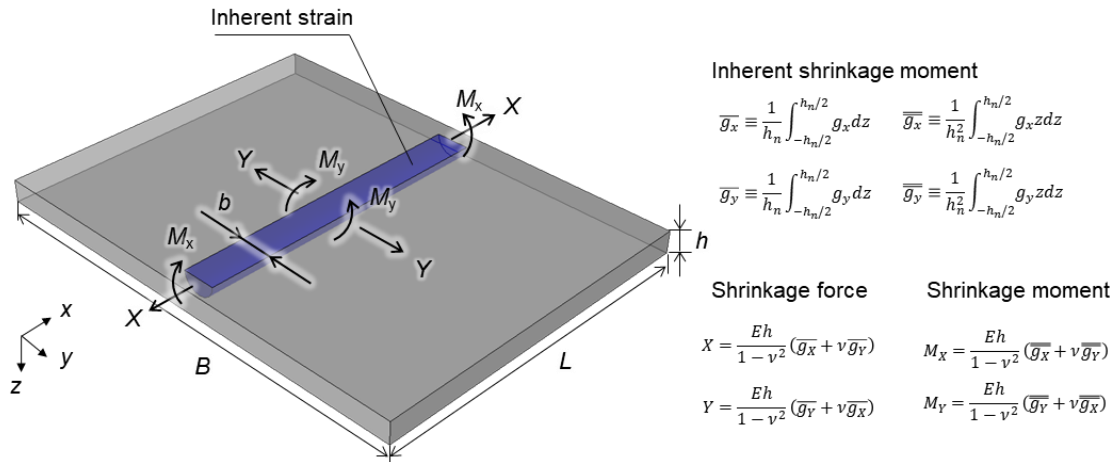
Shrinkage force and shrinkage moment of bead-on-plate welded joint<sup>2.1)</sup>.
